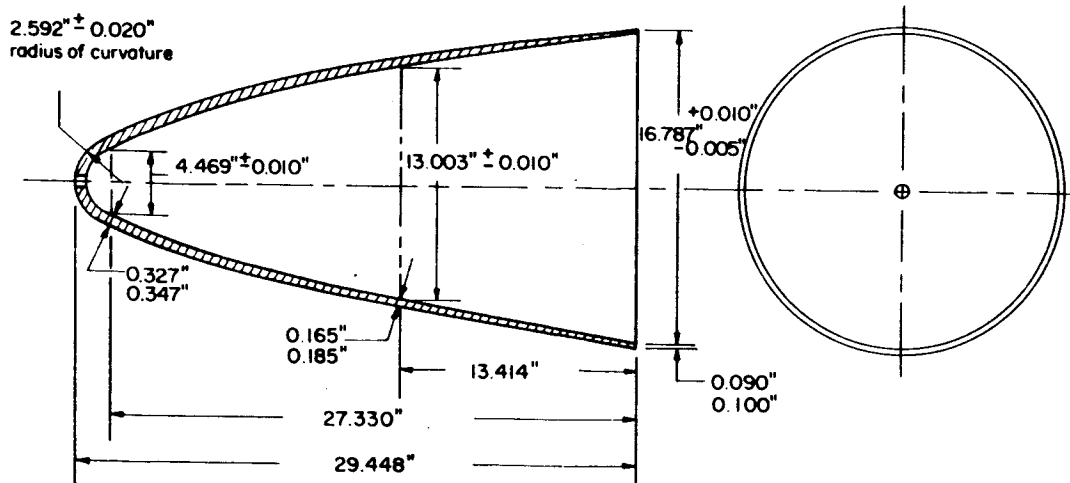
SHEAR-FORMED CONE WITH A TAPED WALL MADE FROM A DISHED 7/8-INCH-THICK ALUMINUM BLANK (REF. 59)
